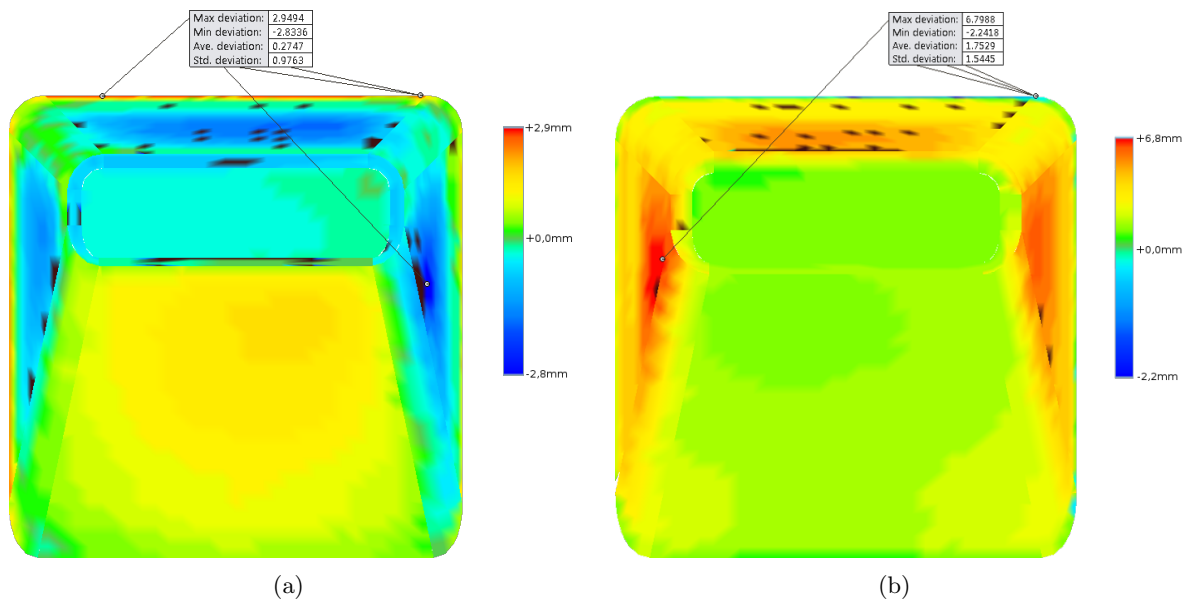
Sheet metal thermoforming moulds dimensional measurement results: (a) positive (b) negative
